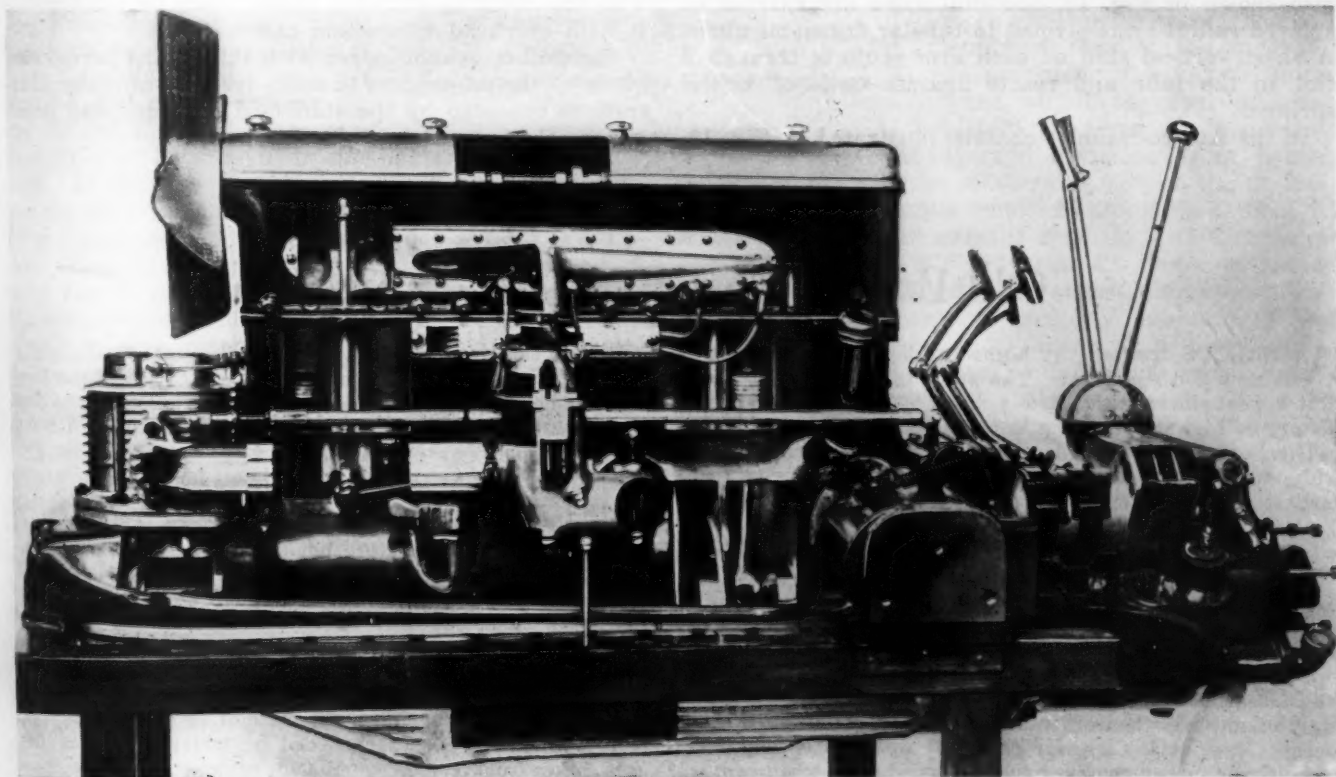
SUPERCHARGED SIX-CYLINDER MERCEDES ENGINE PARTLY IN SECTION
